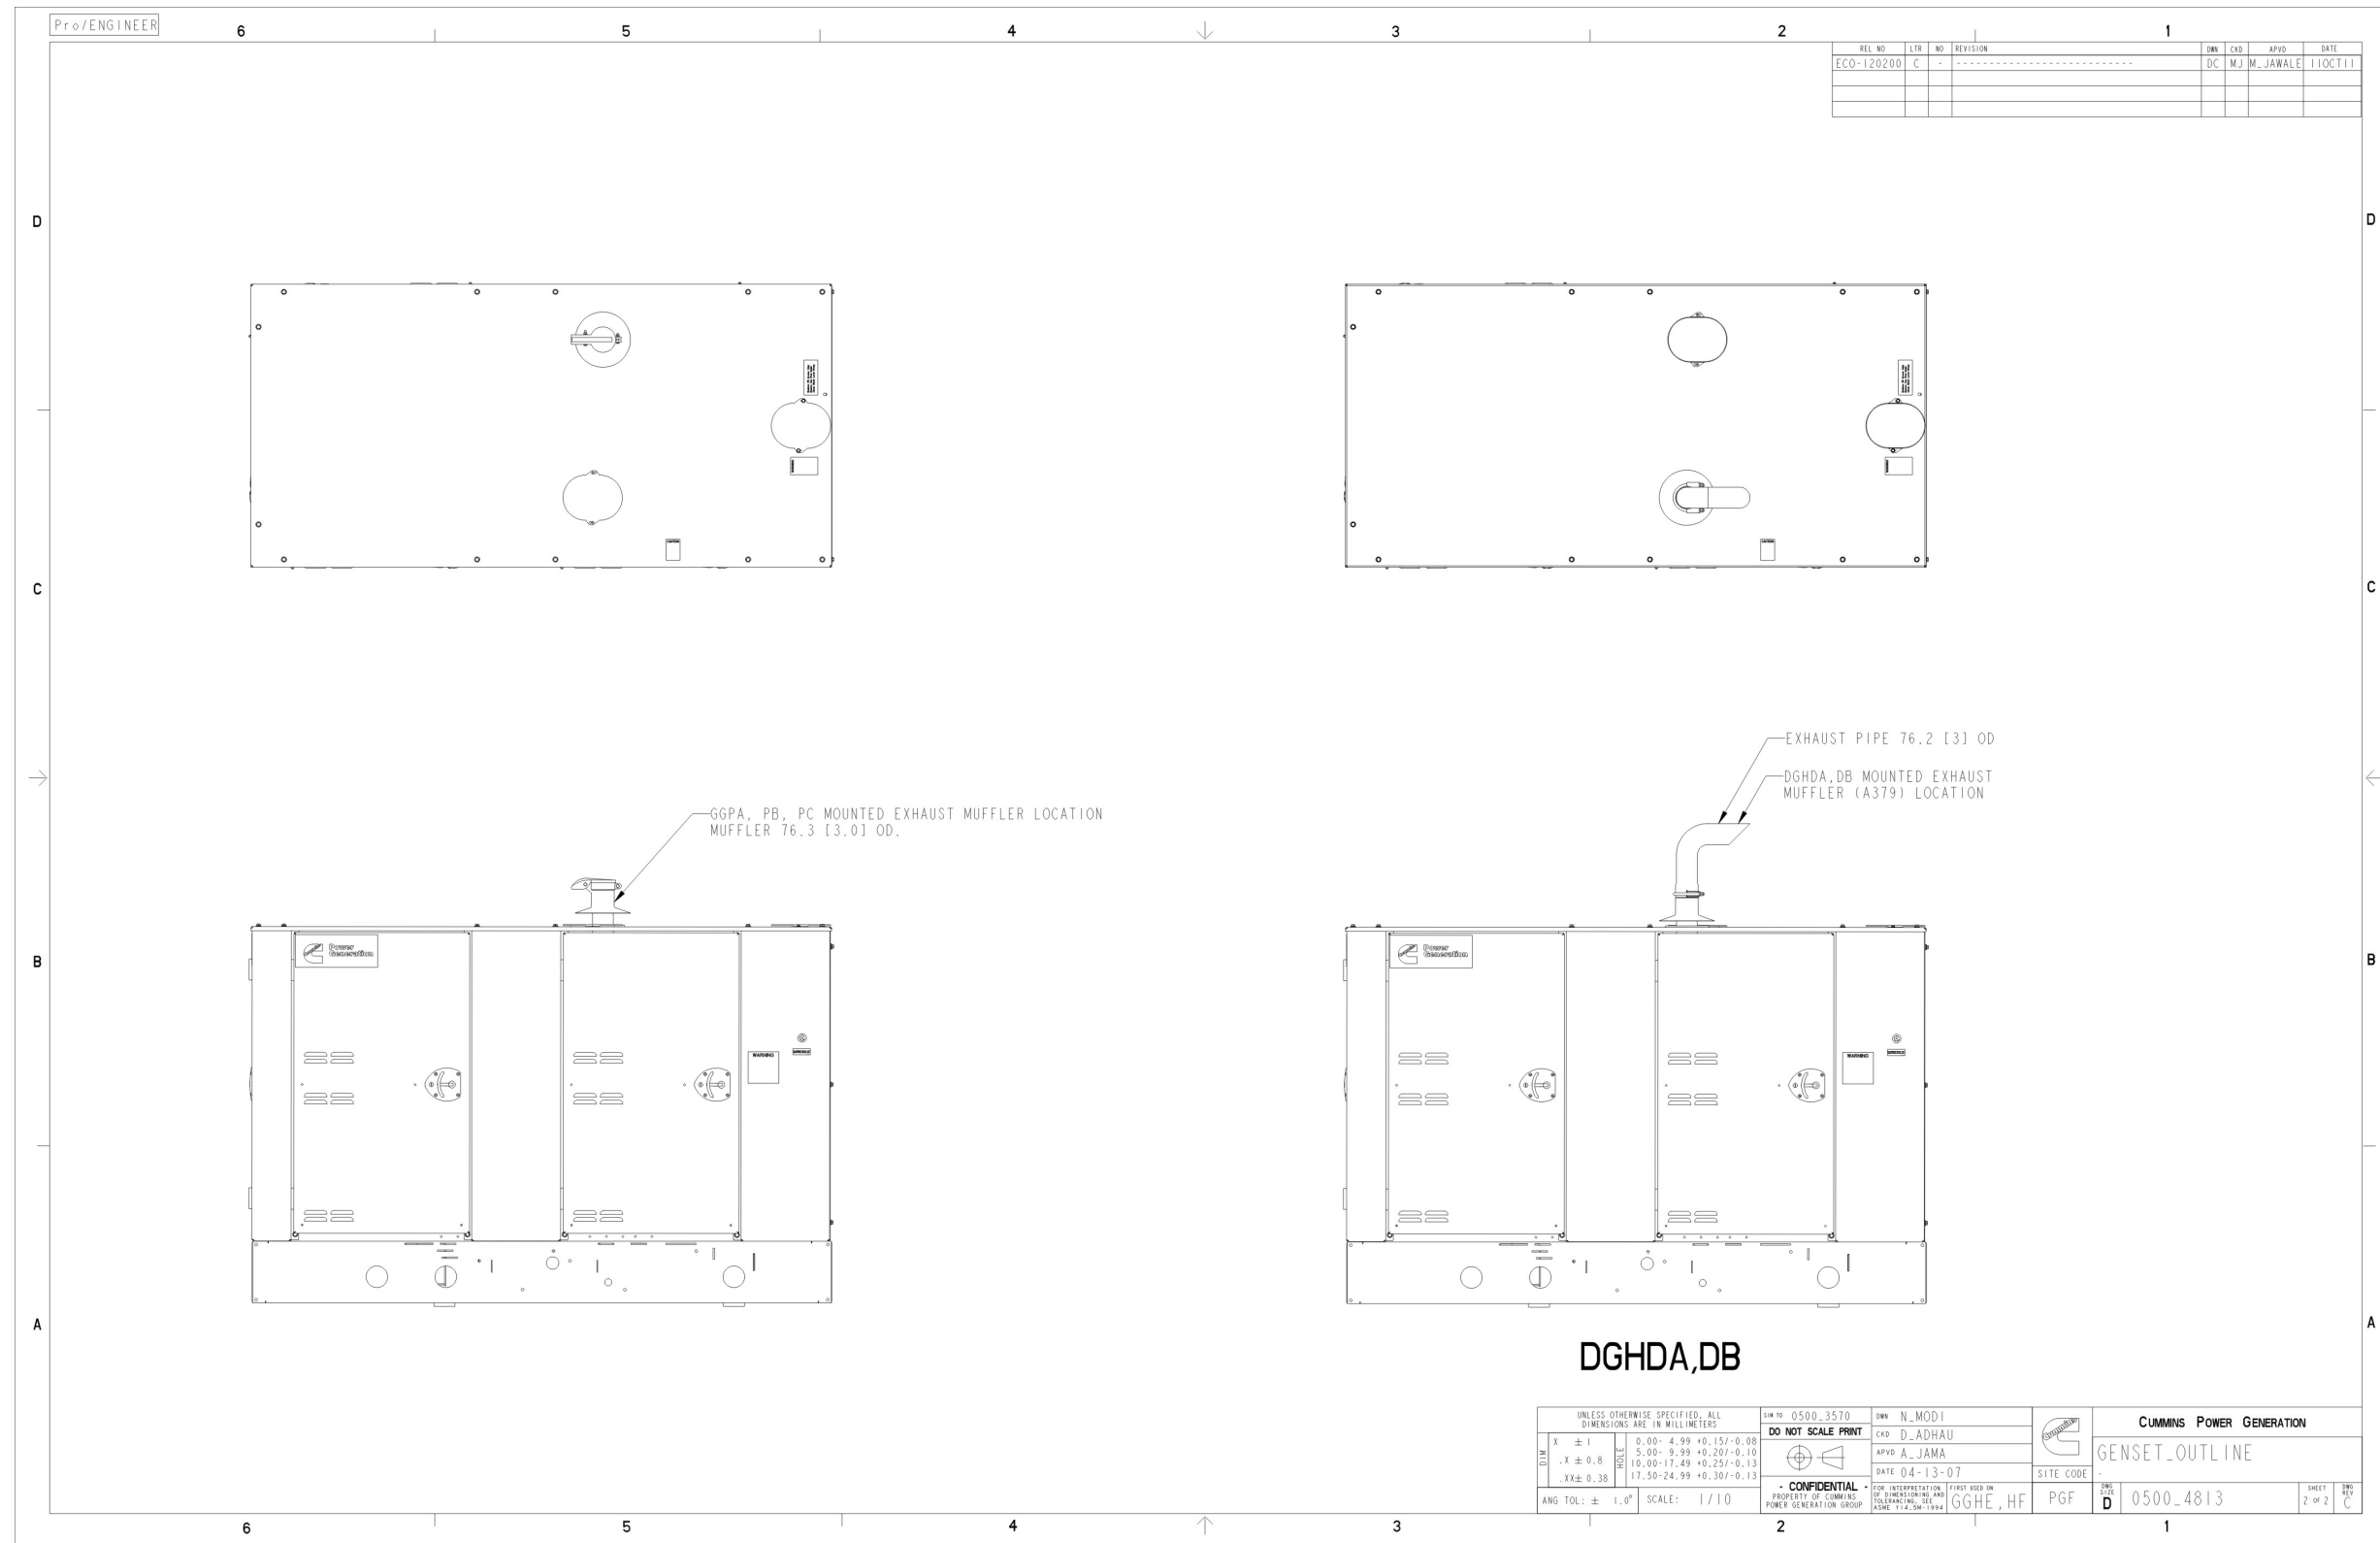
OUTLINE DRAWING (0500-4813 SHEET 2)
